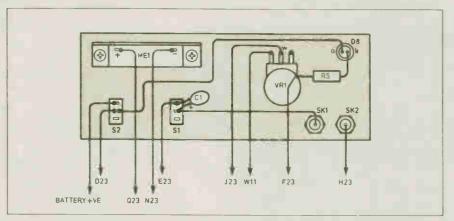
Interwiring between the front panel mounted components. Note that resistor R5 is soldered to the metal body of potentiometer VR1.
